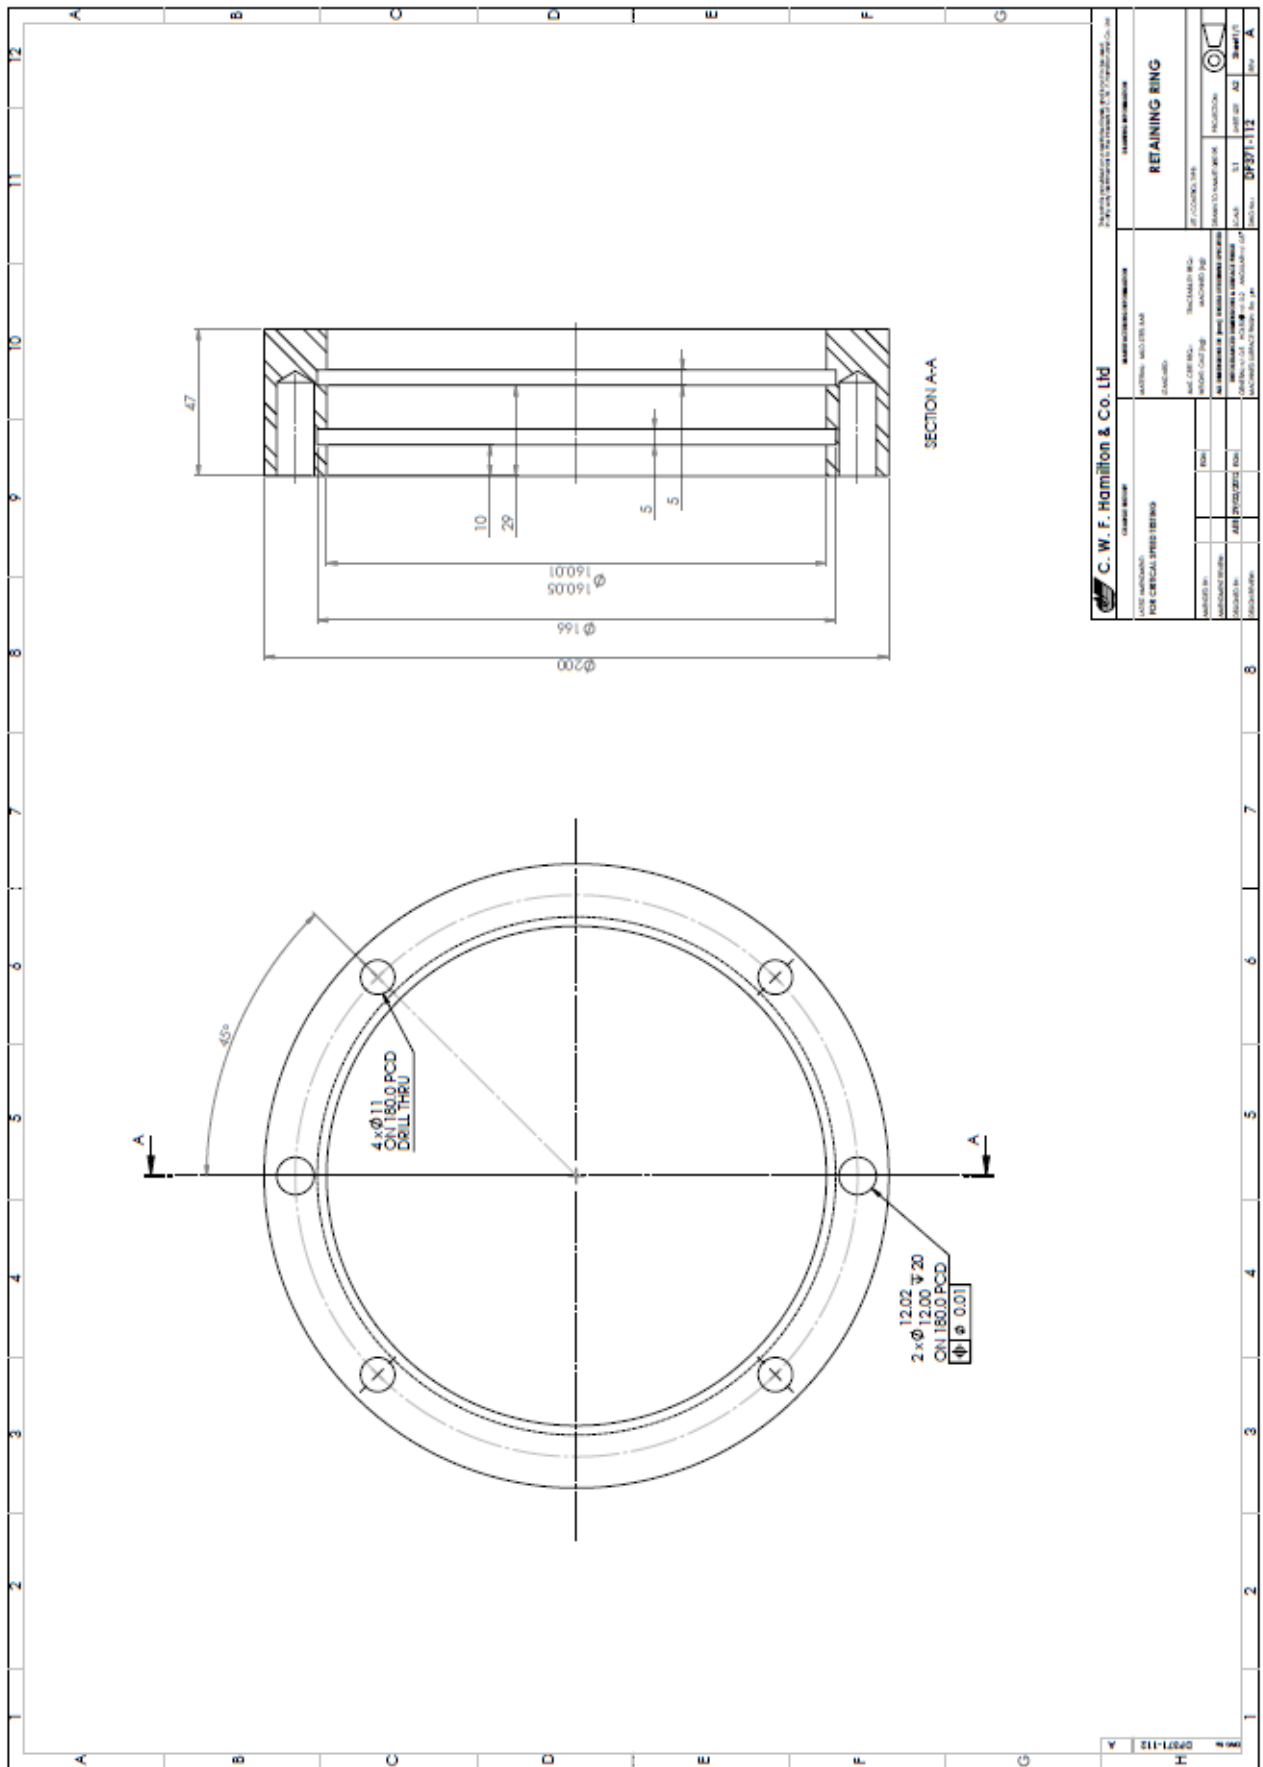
Drawing of the Spherical Bearing Housing Retaining Ring
